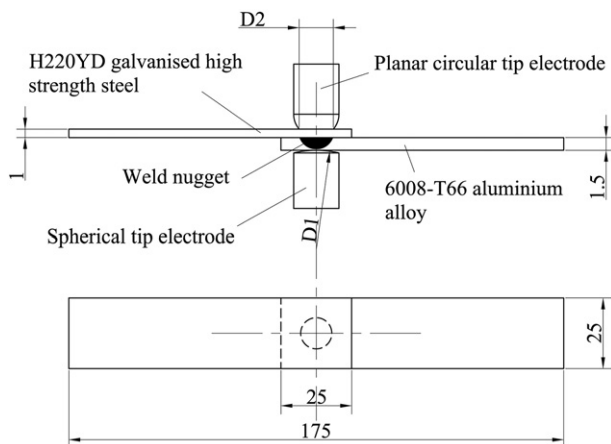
Schematic diagram of resistance spot welding arrangement (not to scale, dimensions in mm).
